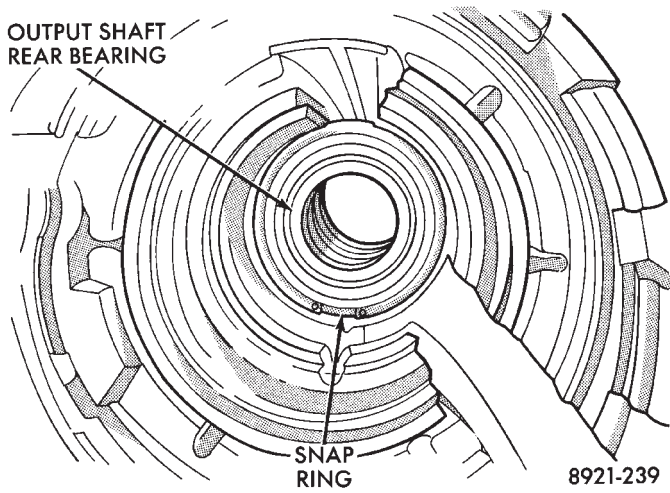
Output Shaft Rear Bearing And Snap Ring Location
